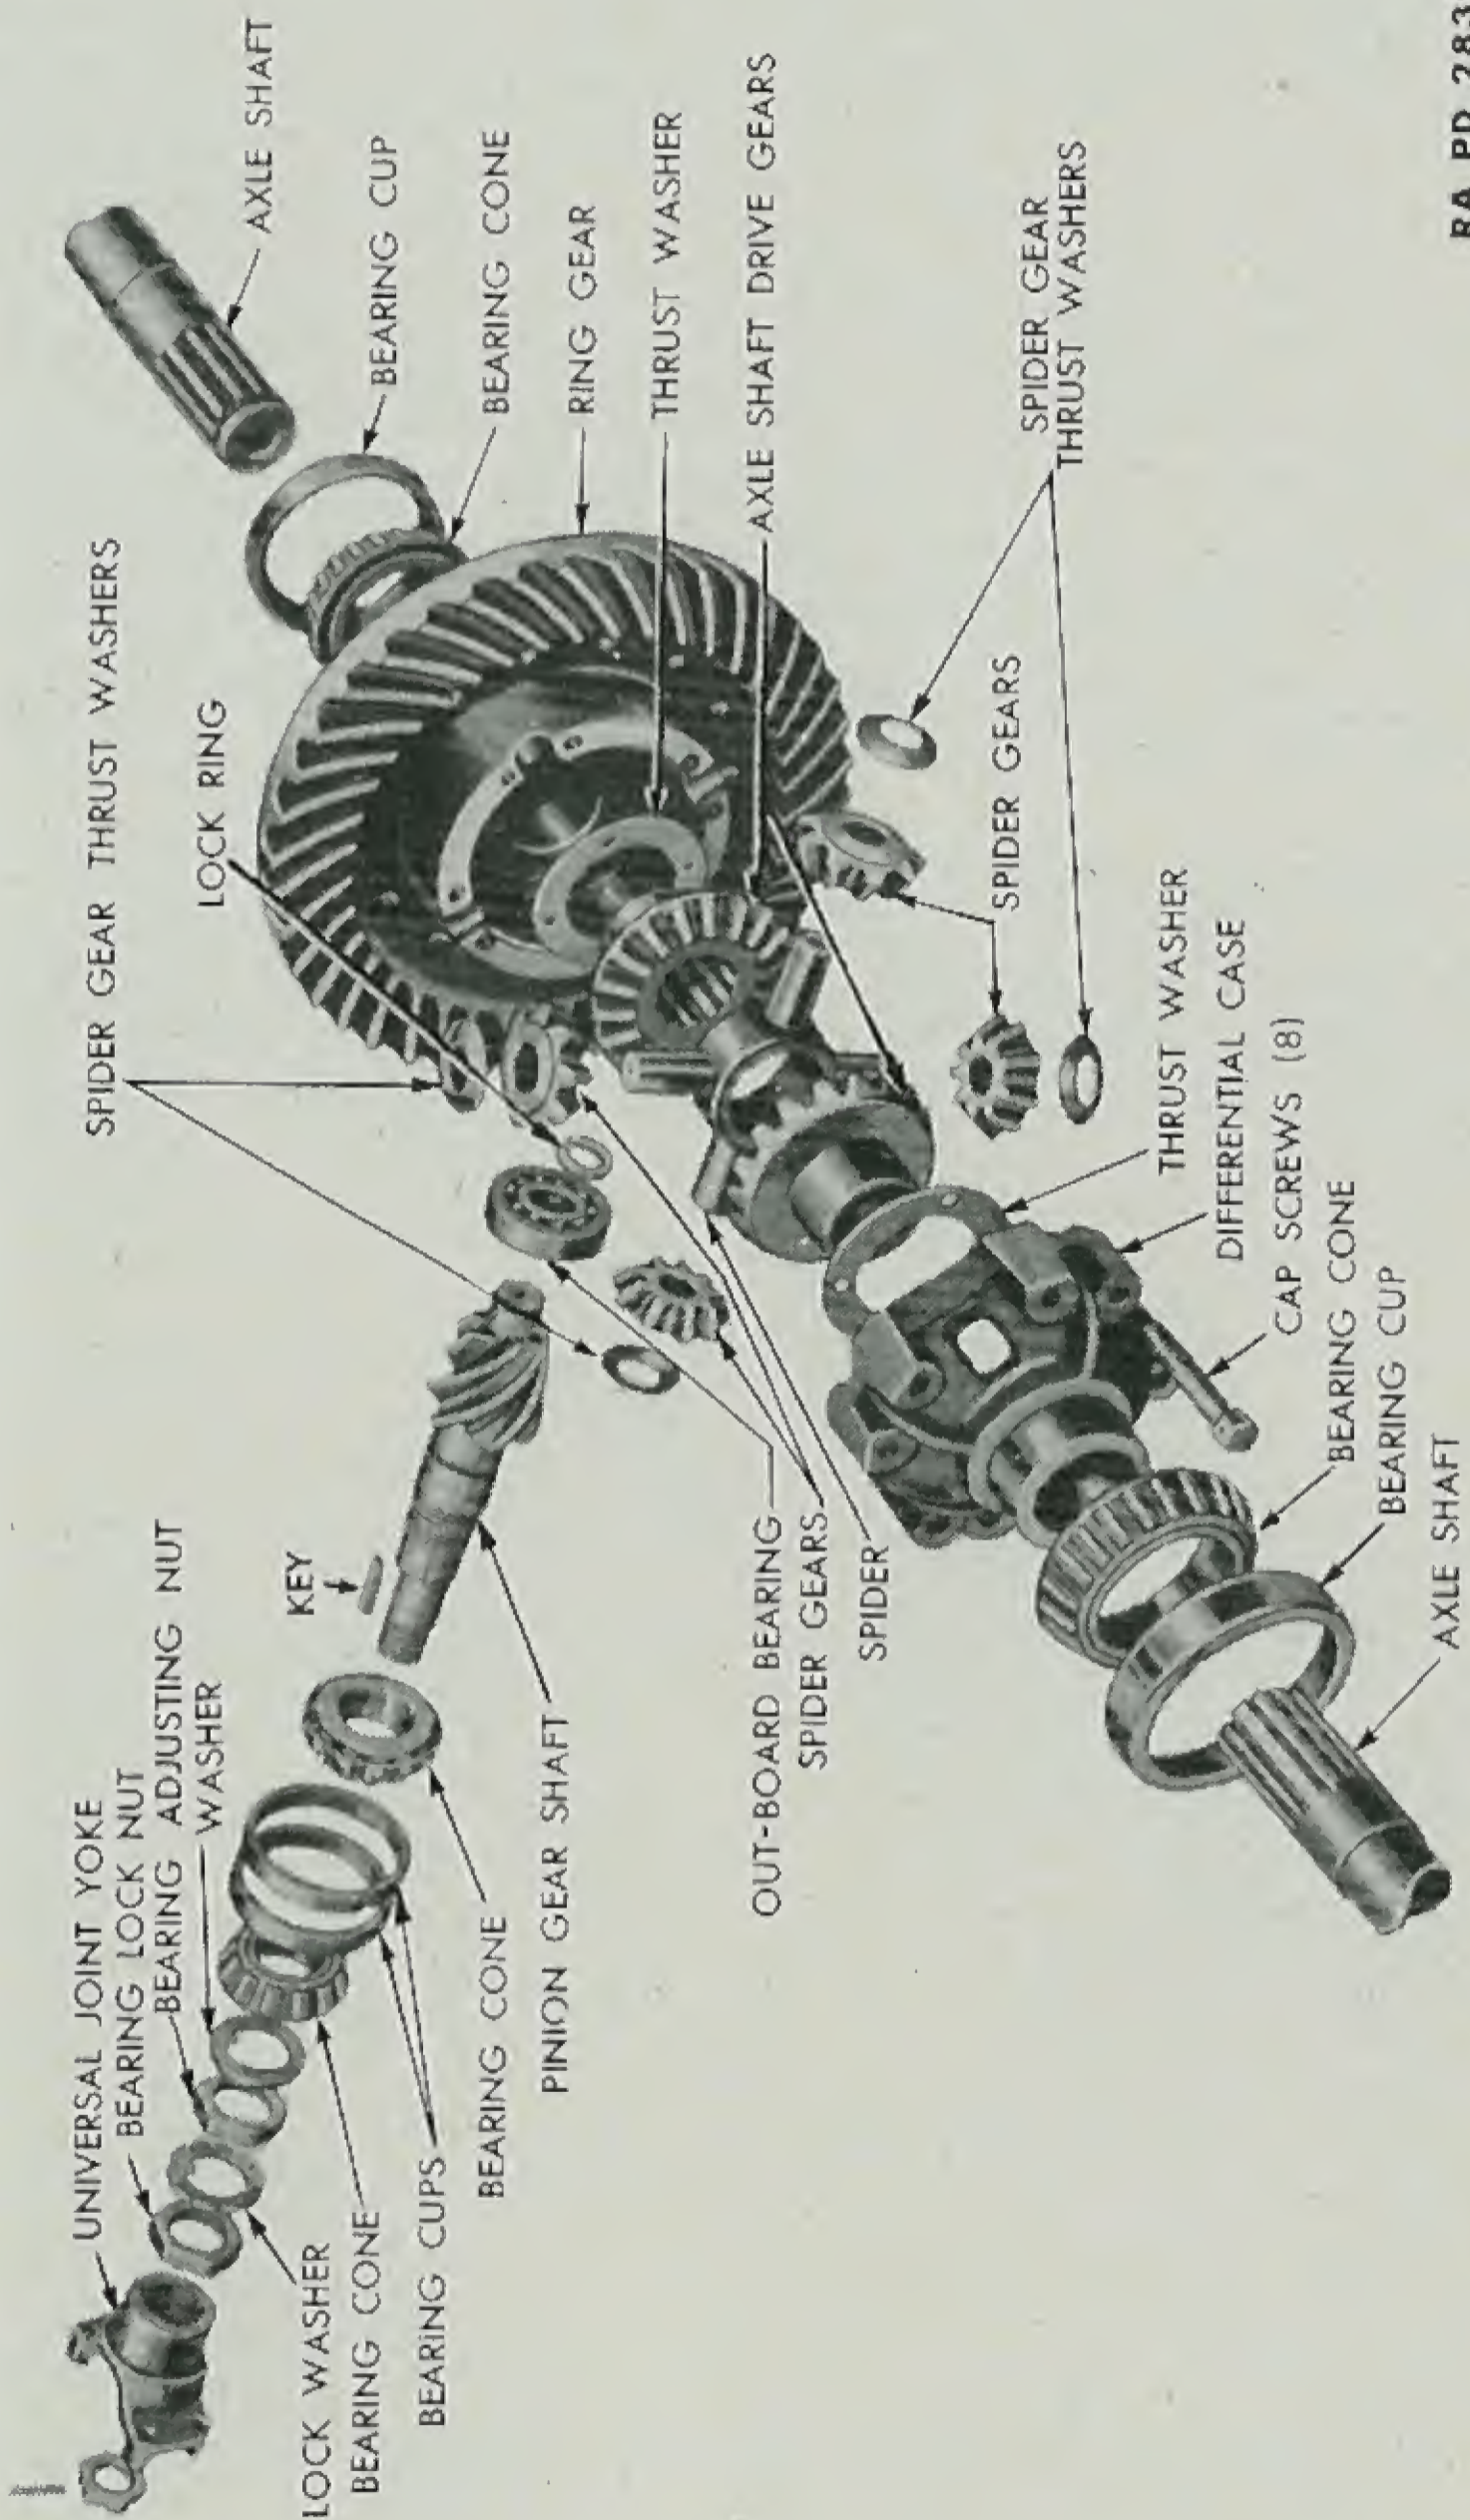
Rear Axle Assembly, Gears, Shafts and Bearings, Disassembled
